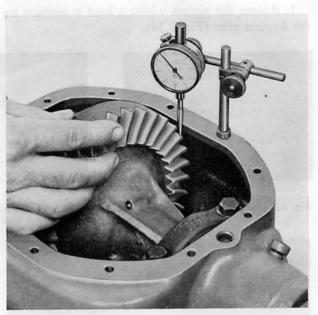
Checking the backlash between the hypoid gear and pinion teeth
